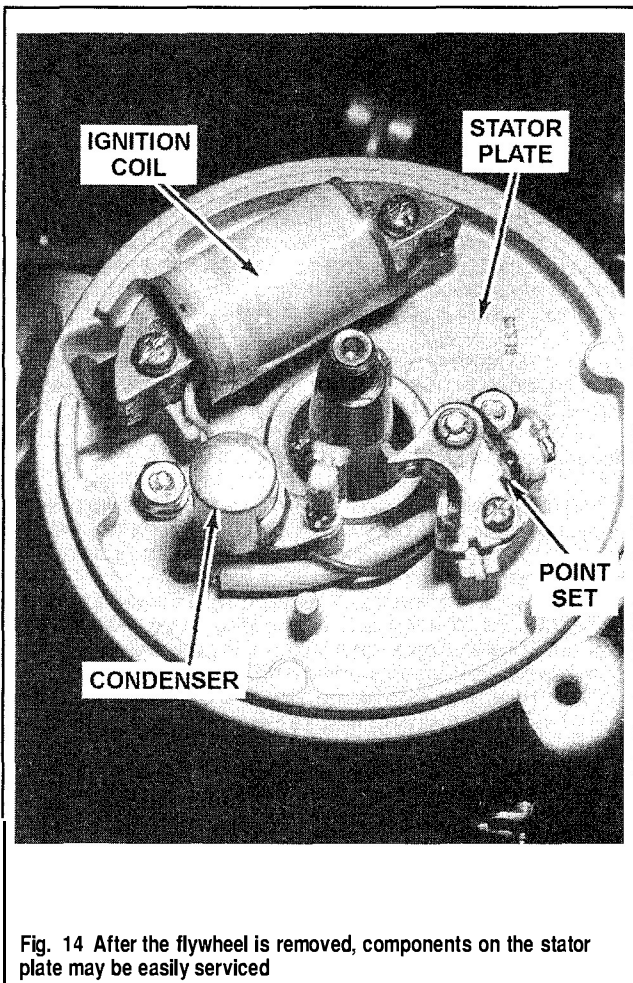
After the flywheel is removed, components on the stator plate may be easily serviced
